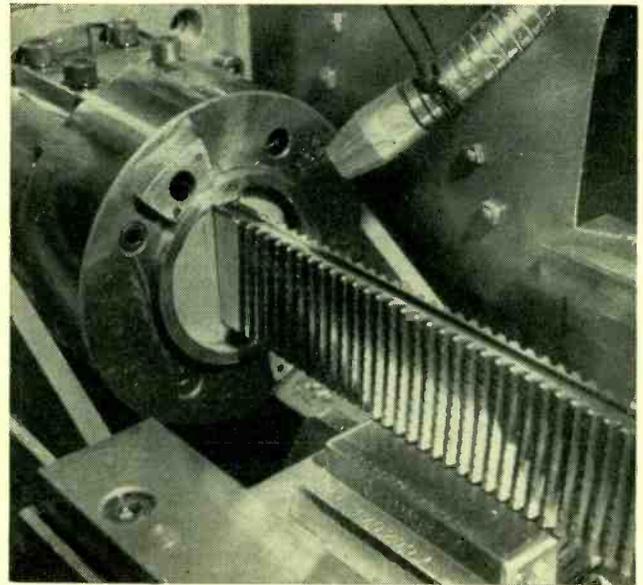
Rectangular opening in magnetron shell is broached in two operations. Grooves running the length of the broach fit into keys and guides on fixtures to insure concentricity
